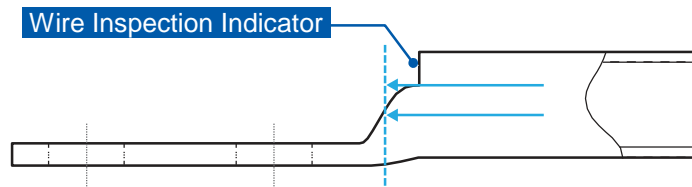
Inserting a Power Cable into a Cable Lug, Depth Reference Diagram
